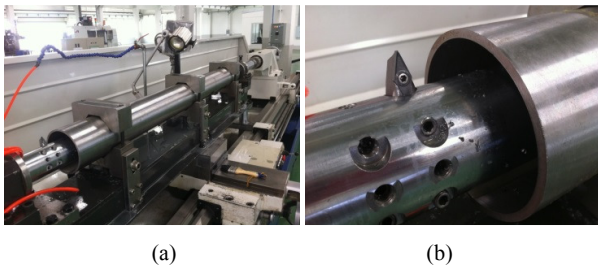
(a) Workpiece and machine setup for modified boring tool on lathe machine, (b) V-shaped carbide cutting insert equipped on a spinning mandrel
